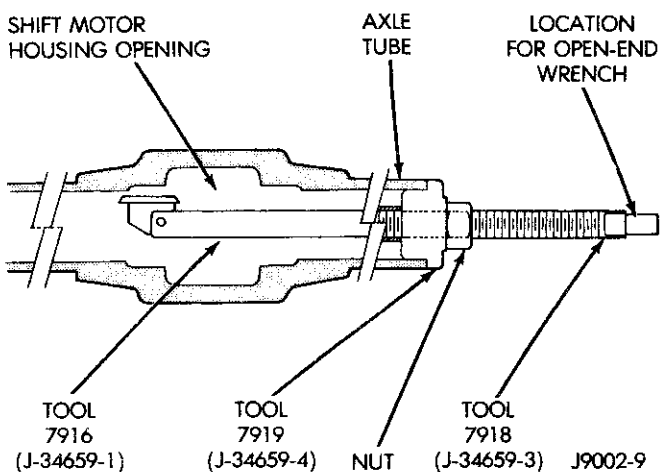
Axle Shaft Bushing Removal Tool Installed
